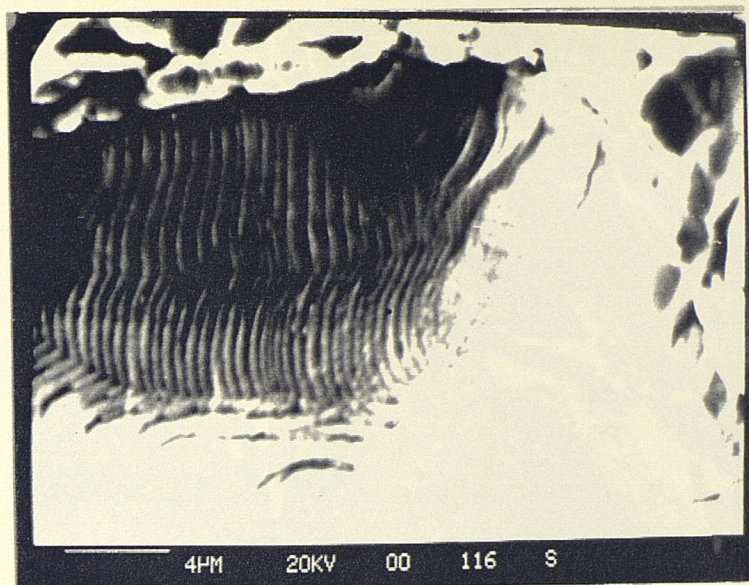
Thermally etched shrinkage pore surface in a weld induced crack fracture surface. x3500.
